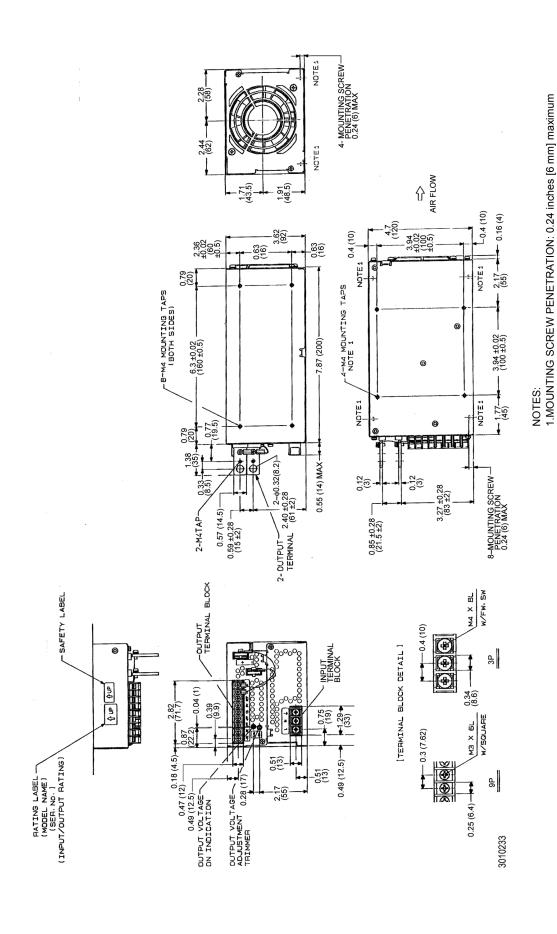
MECHANICAL OUTLINE DRAWING OF THE RKW 600W POWER SUPPLY
